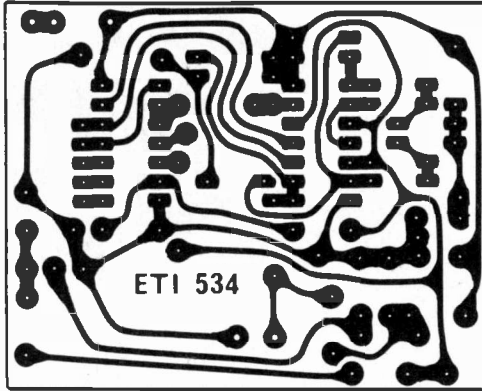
Printed circuit board layout. Full size 64 x 52mm.
